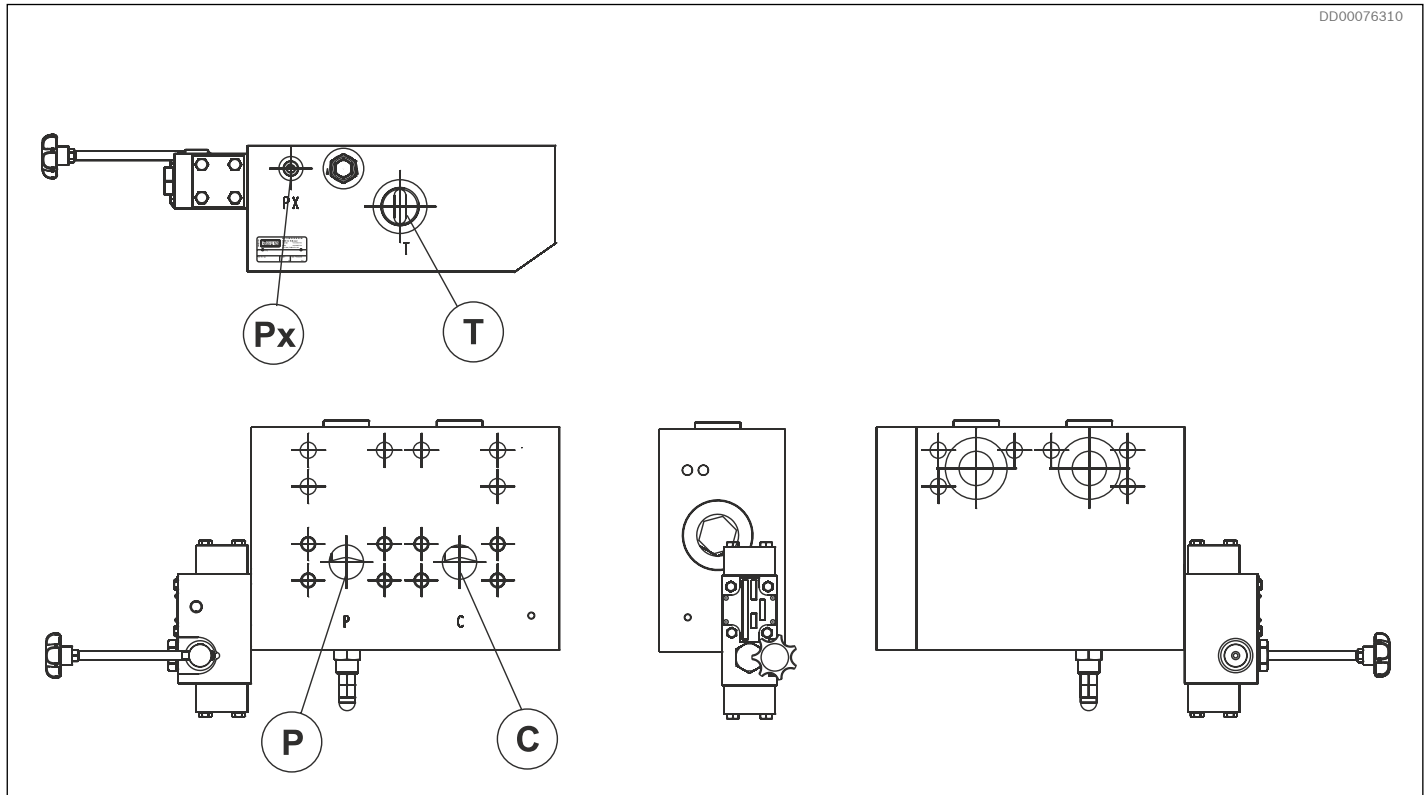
Installation drawing - VFWCB 600 H, VFWCB 600 H Ex
